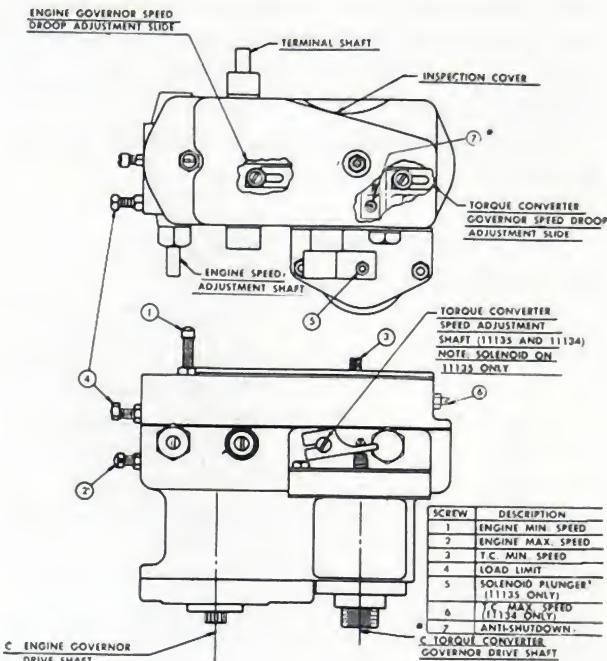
10941, 11134 and 11135 governor adjusting screws
